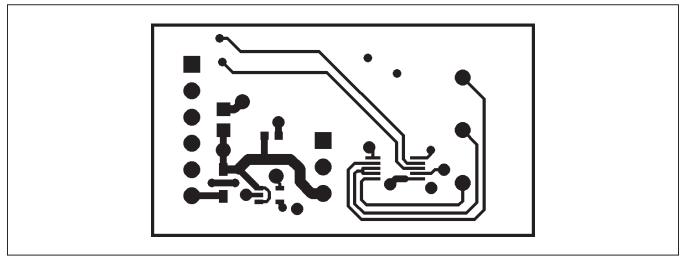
MAX11205PMB1 Peripheral Module PCB Layout—Component Side
